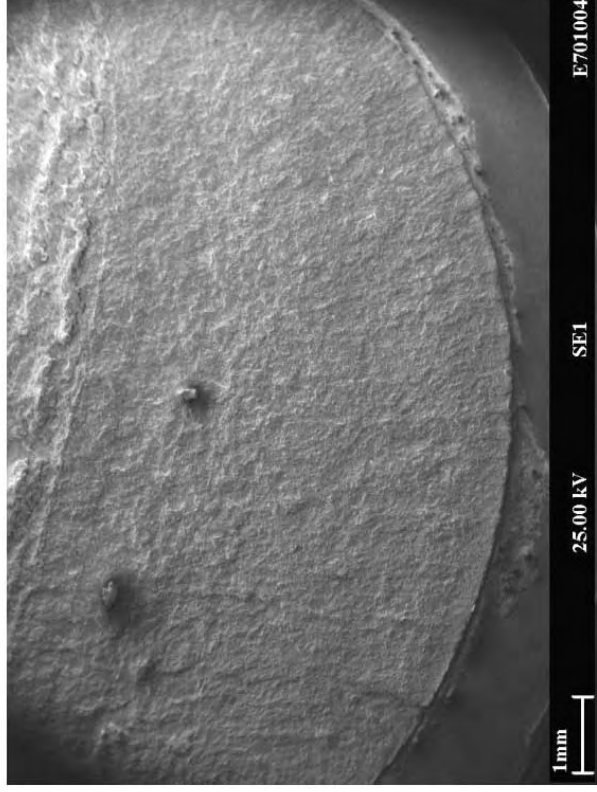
SEM fractograph, showing starboard side fatigue crack in the middle bolt.
